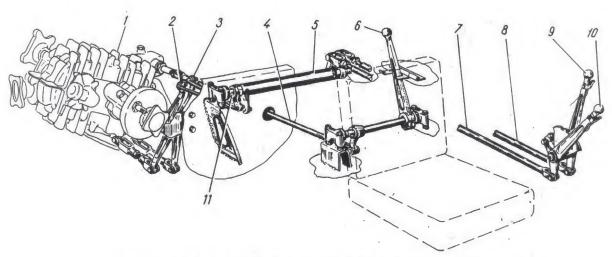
FRONT AXLE, RANGE AND AUXILIARY WHEELS CONTROL LINKAGE
